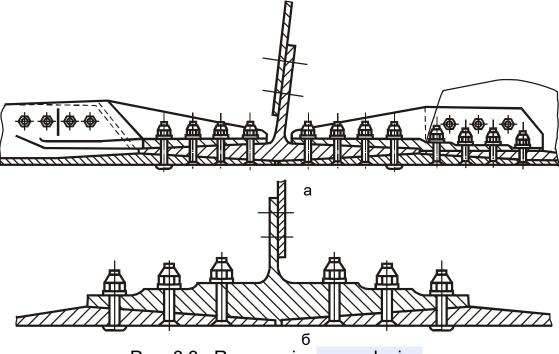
Rearranging zone design: a - panels of the wing of the IL-86; b - IL-76 wing panels
